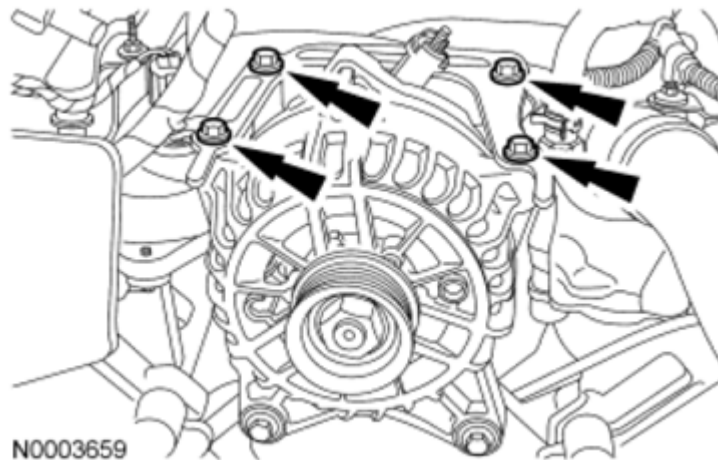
Locating Generator Mounting Bracket And Mounting Bolts
